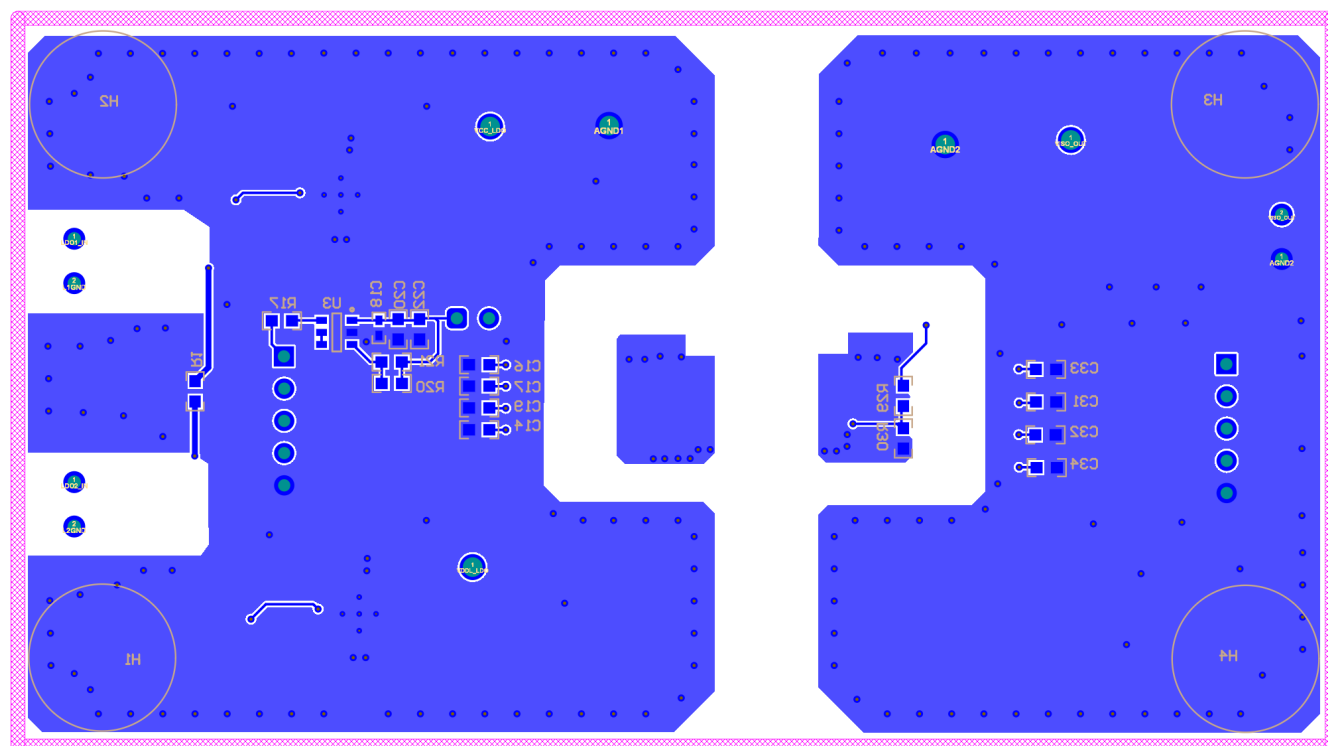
ISOW6441DWEEVM PCB Layout - Bottom
